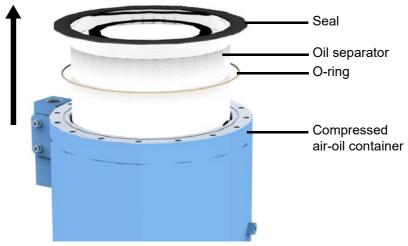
Structure of the compressed air-oil container/integrated oil separator
